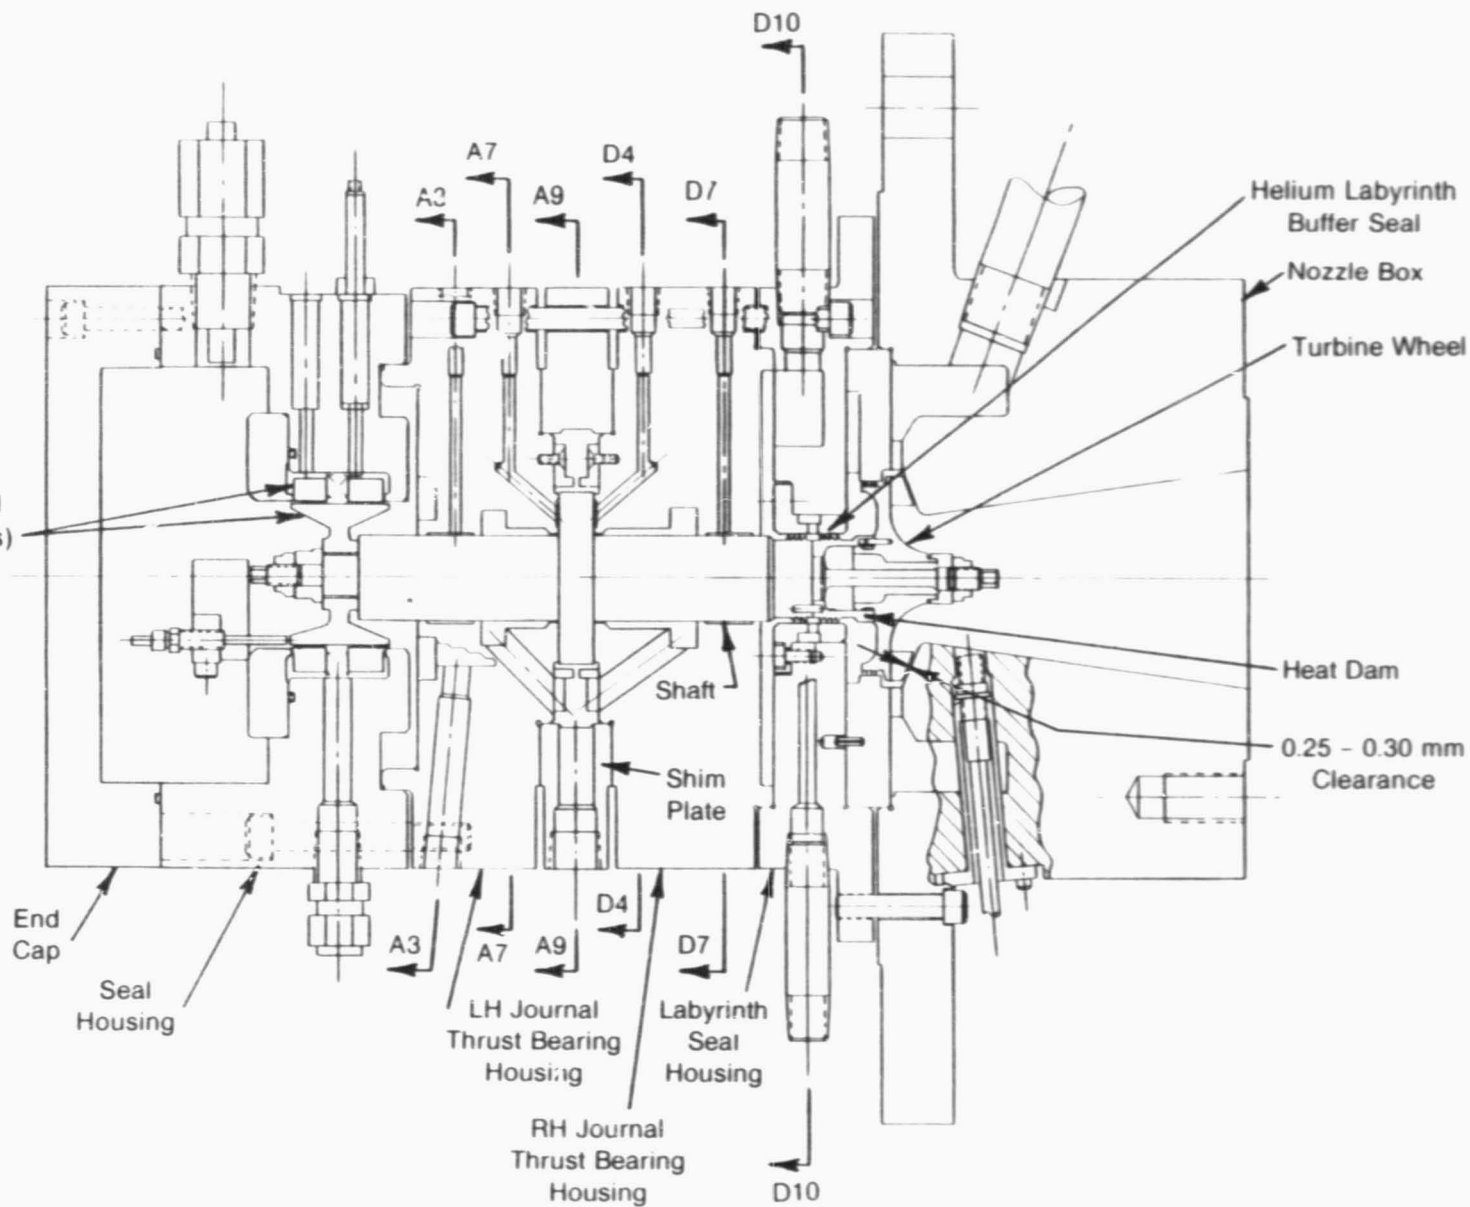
Cross Section of Test Rig; Housing Sections Identified
